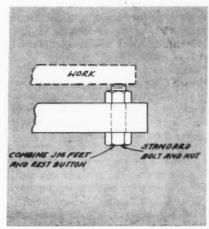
In this design, a standard nut and bolt act as jig foot and work rest button.
